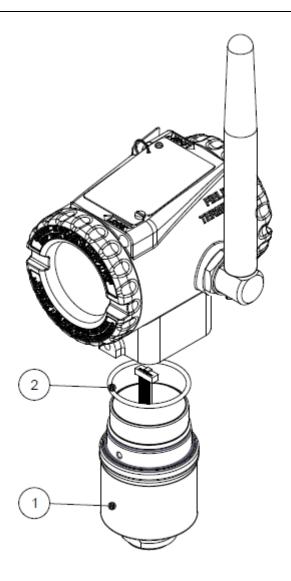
(a) – Exploded View - Differential Pressure Transmitter
